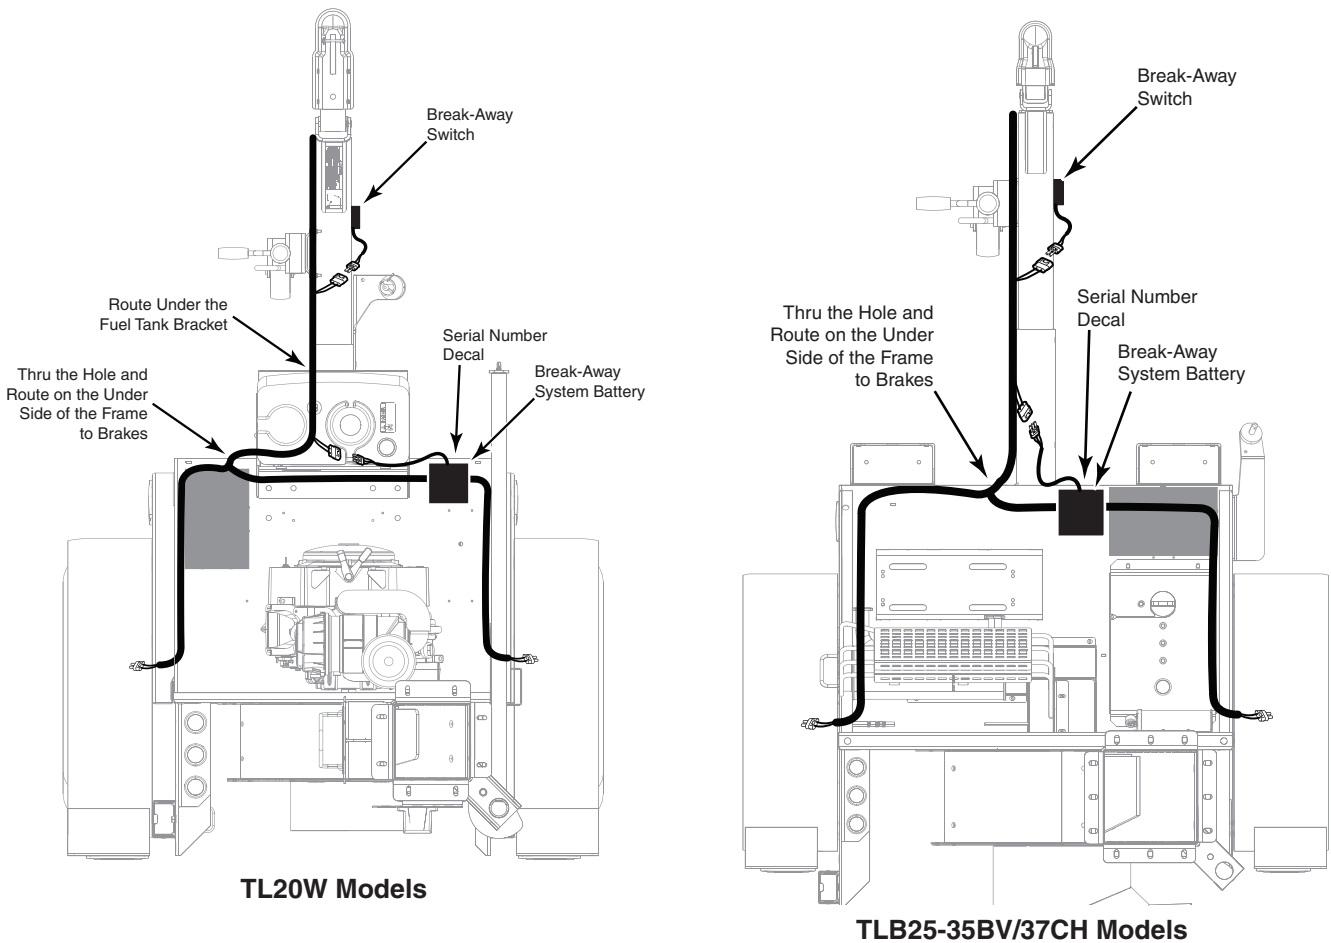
TL20W and TLB25-35BV/37CH Brake Kit Wire Harness Connection
